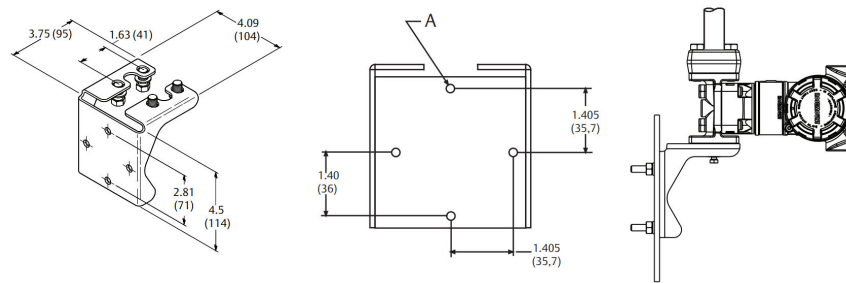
Mounting bracket option codes B1, B7, and BA
